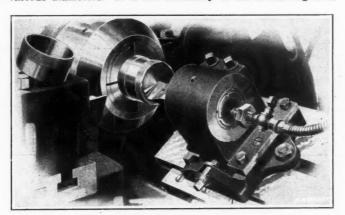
Set-over Tool-holder in Operation on 3-inch Hole
